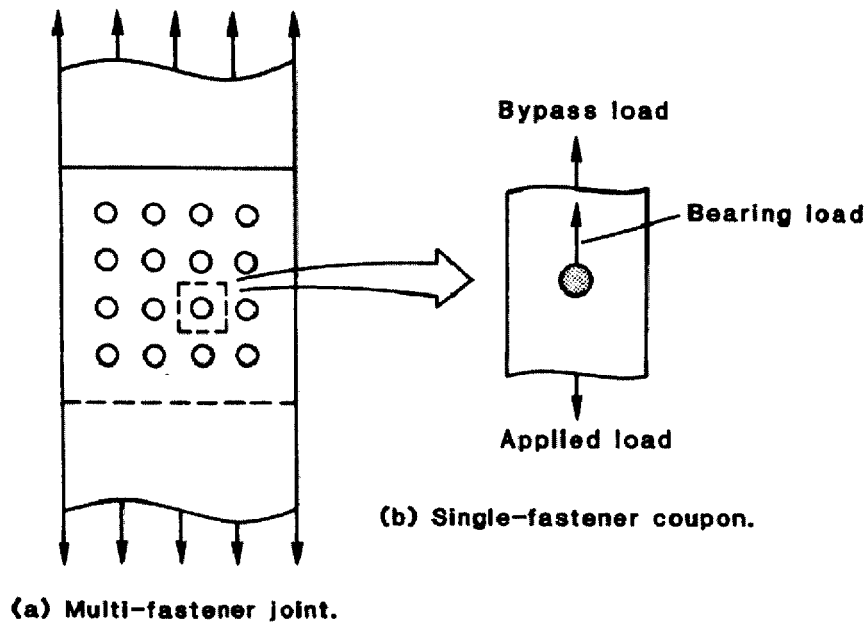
Bearing/Bypass loading definition (Ref. 5.3)
